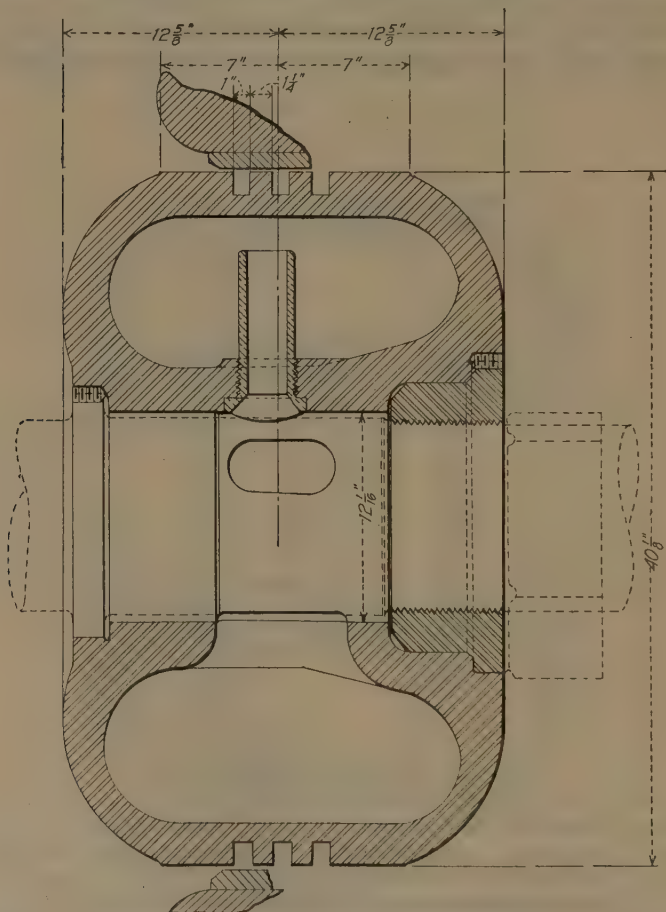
FINAL FORM OF 40-IN. STEEL PISTON
